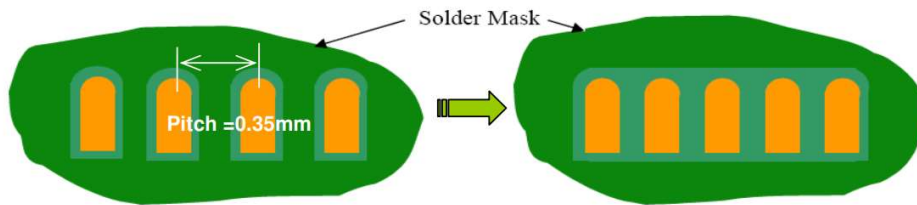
Between the pads, it's recommended to use “trench” type solder mask opening to design.
